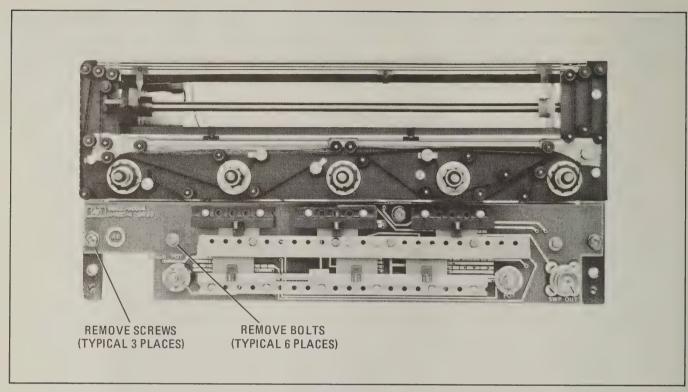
Removal and Dissassembly of A9 Switch Assy and A10 Front Interconnect Assy
